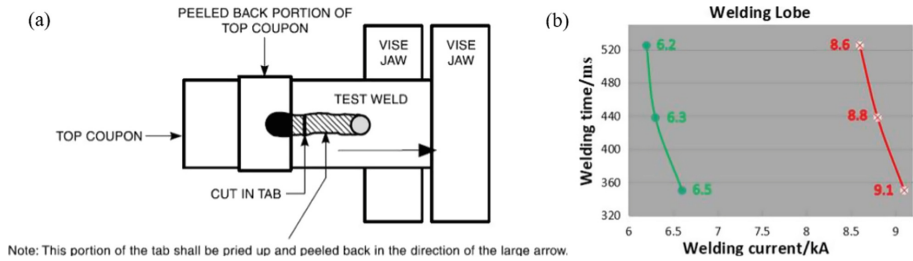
Tearing test and welding lobe: (a) Peel test of welded joint; (b) Welding lobe.
